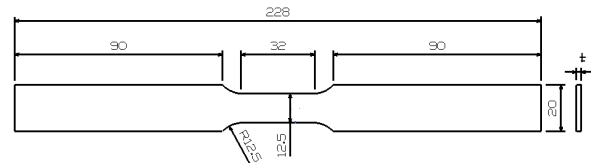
Configuration and dimensions of specimen for tensile and fatigue tests
